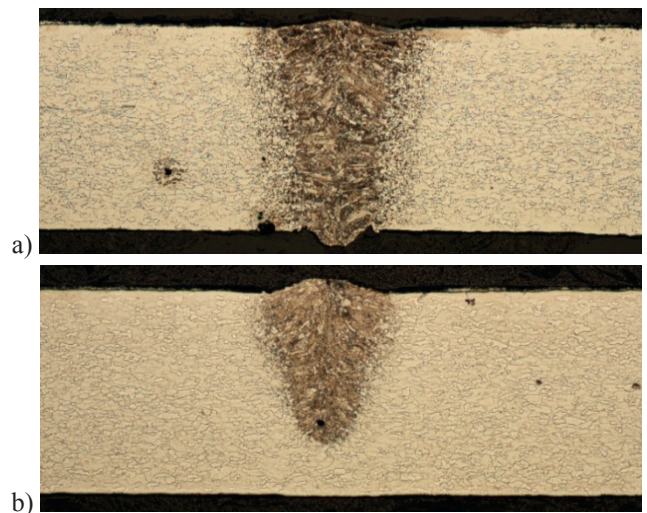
Cross sections of the bead-on-plate welds produced on the 0.8 mm thick electro-galvanized steel sheet DC04 by a disk laser, Table 3; a) bead B11 (750 W, 6.0 m/min, 7.5 J/mm), b) bead B12 (lack of penetration)
